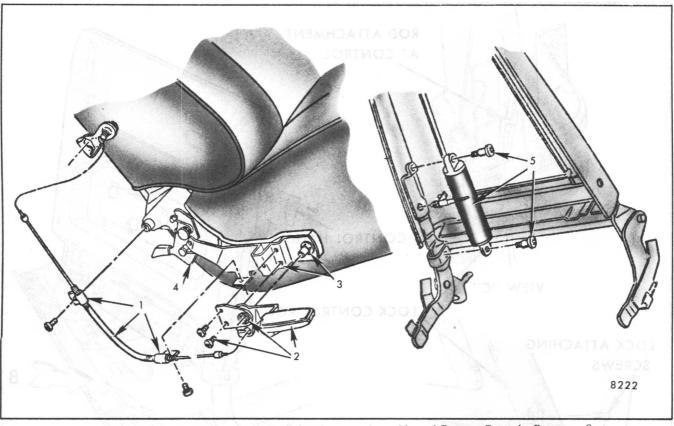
Custom Bucket Seat Back Reclining Actuator Assembly and Remote Control - Passenger Seat
